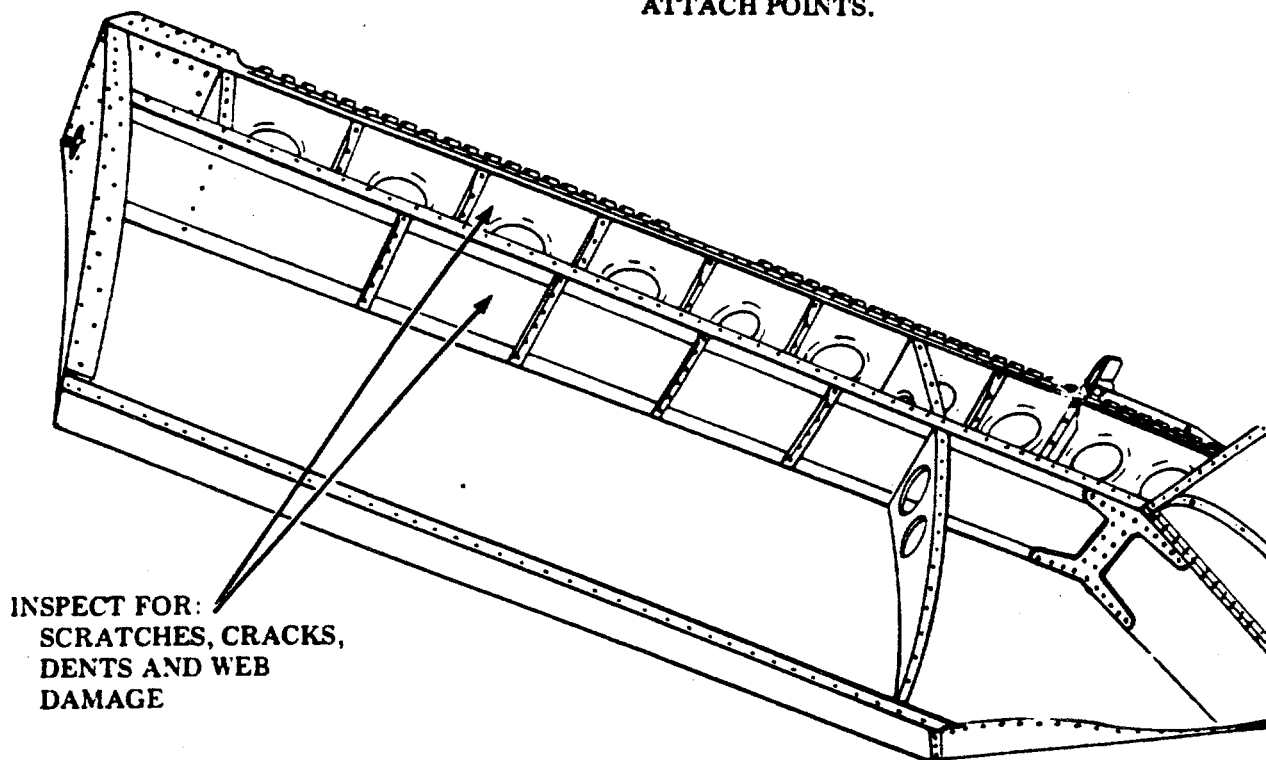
A Damage limits- tail rotor drive support fitting (Sheet 4 of 4)
